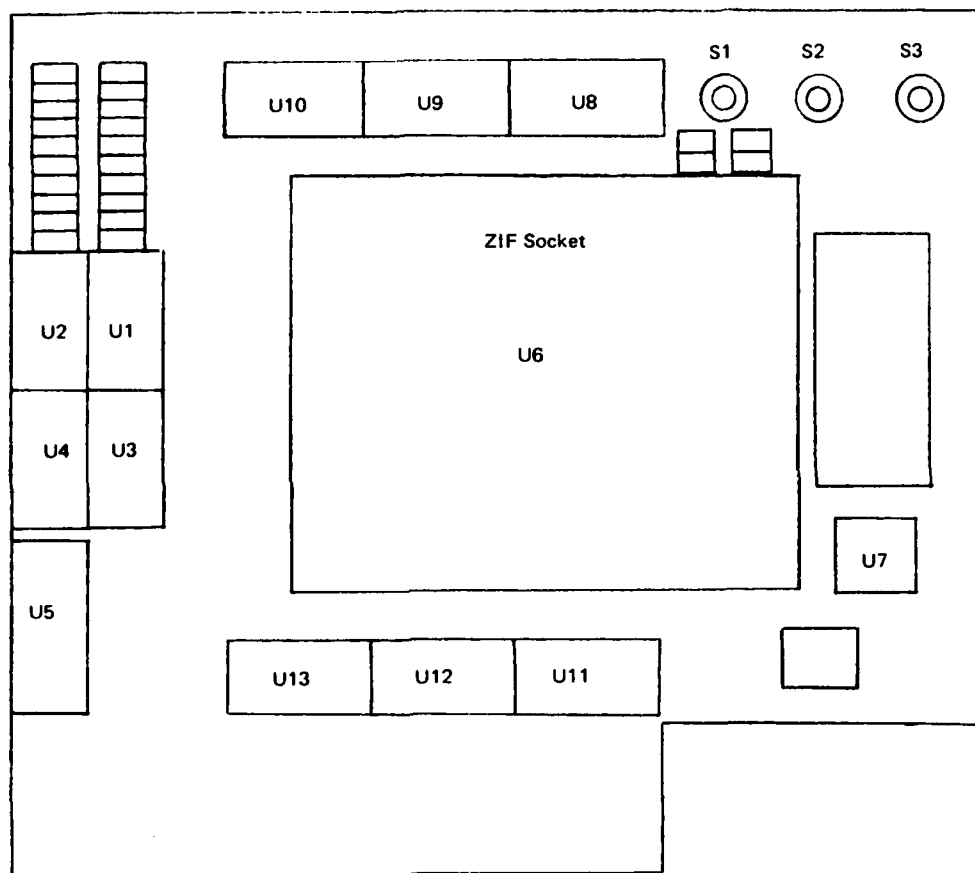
SCS481 Test Circuit Board Outline Drawing
